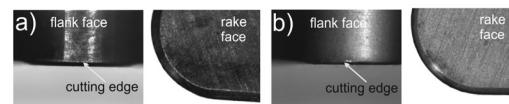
Digital images of tool wedge taken by Baty Venture 2010, table 200x100x160, head TP20 Renishaw for a) CB20, b) 7020 cutting tool material
